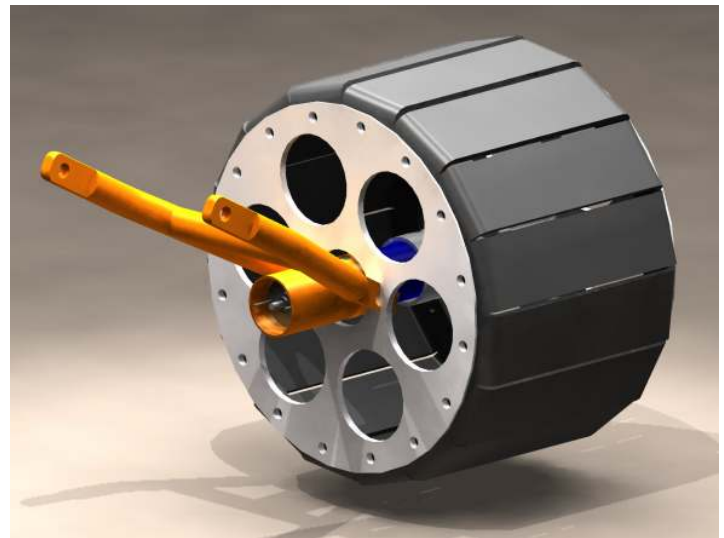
Redesigned wheel mount with 16 sheet metal flats for tires.
